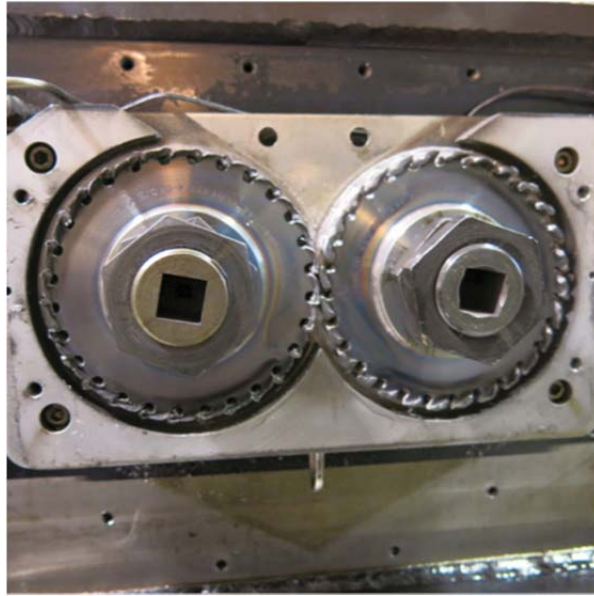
Post-test condition of the gears (gearbox cover and outer high temperature glass removed).
